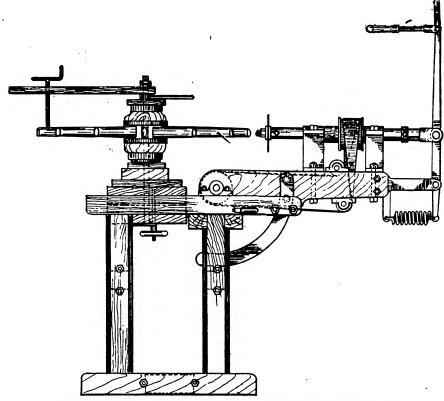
THE COMBINED BORING MACHINE AND WHEEL BENCH FROM THE SIDE
